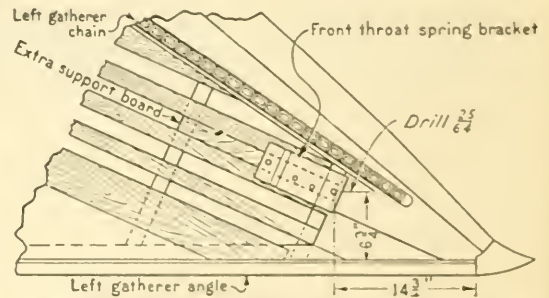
Connection of front throat-spring bracket to platform, Massey-Harris corn binder
